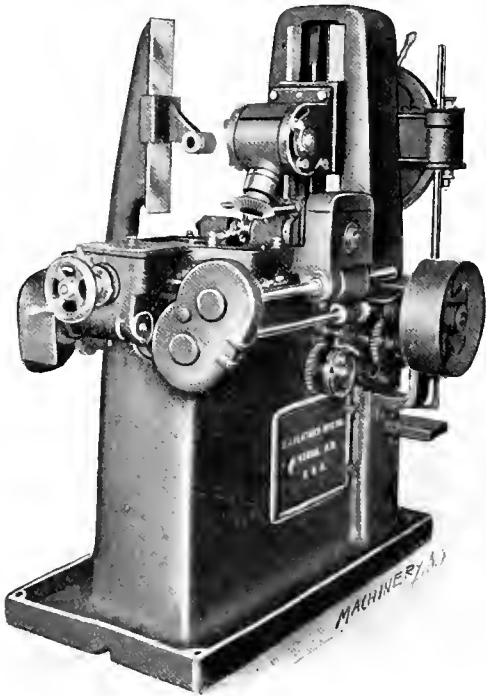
Bevel Gear Cutting Attachment applied to an Automatic Spur Gear Cutter.
